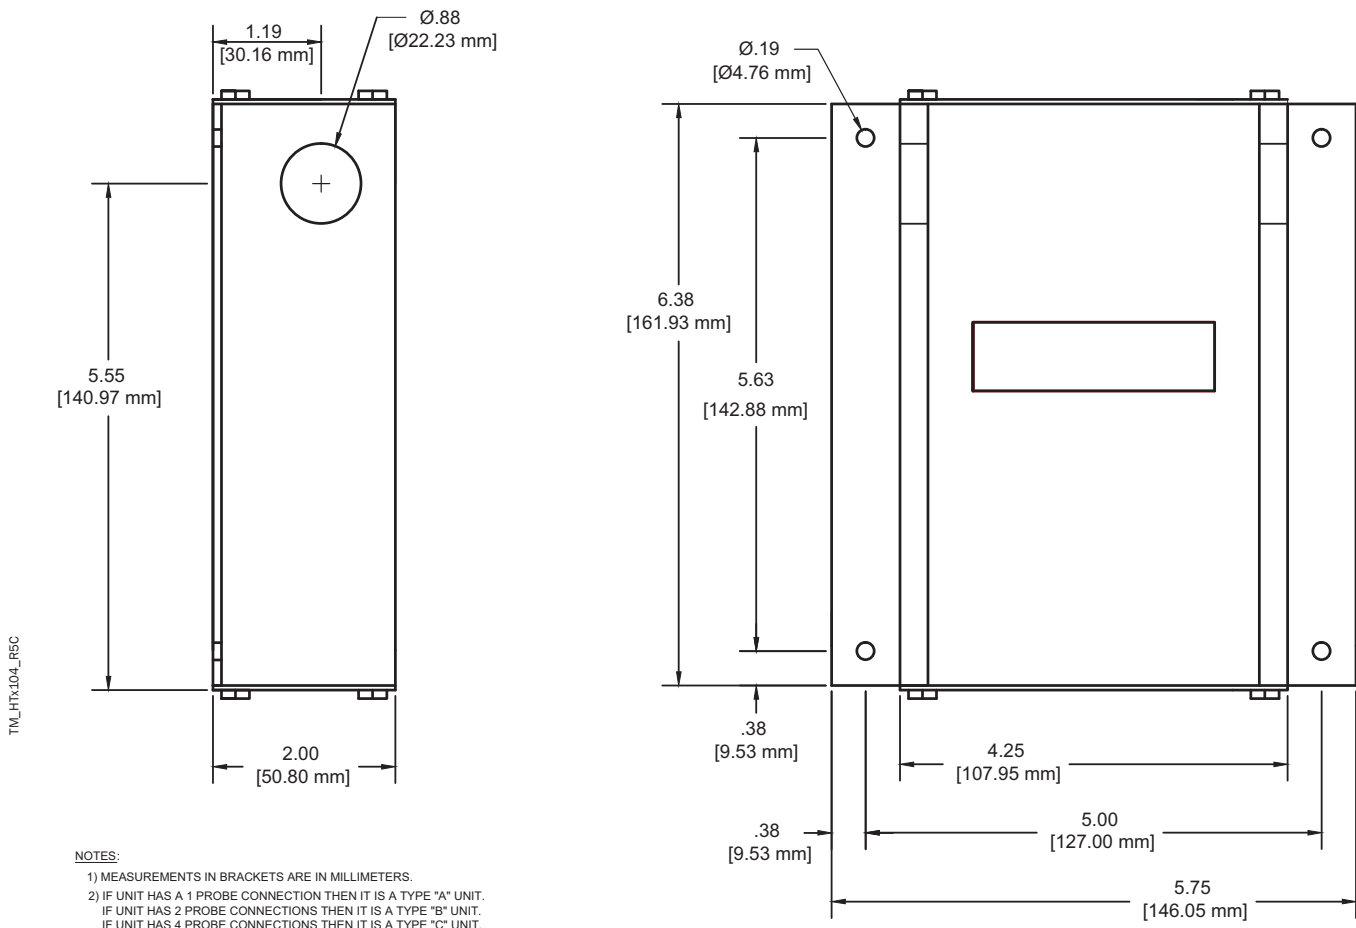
HTx104 Transmitter Mechanical Detail Drawing
